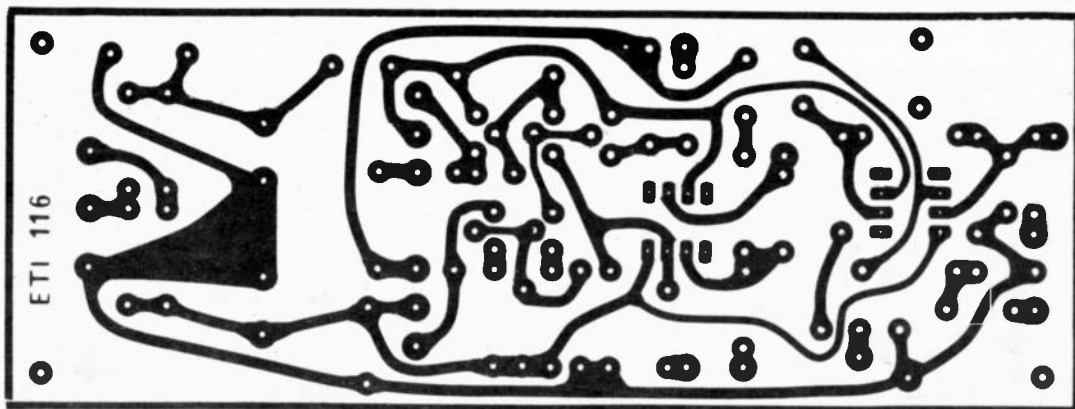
Printed circuit board layout. Full size. 140 x 62 mm.
